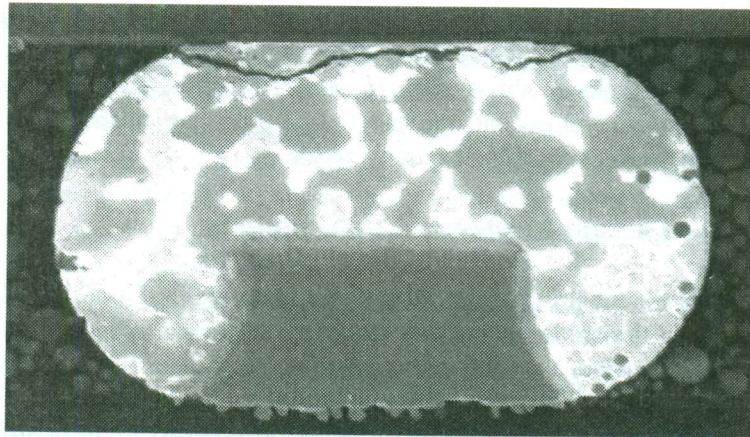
Fatigue crack developed in a solder ball type solder joint of a flip chip package.
